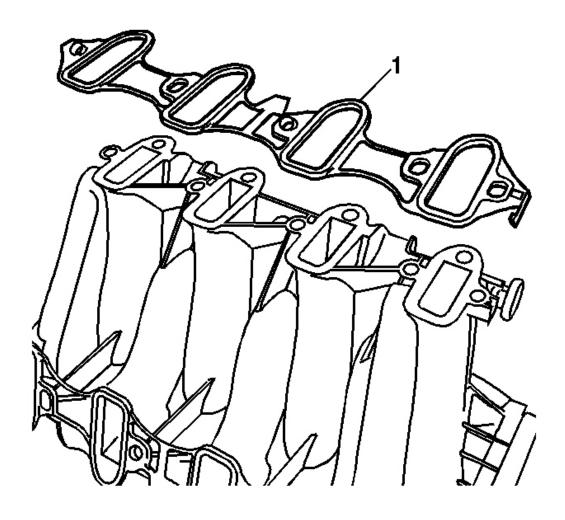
View Of Intake Manifold Gasket Courtesy of GENERAL MOTORS CORP.
